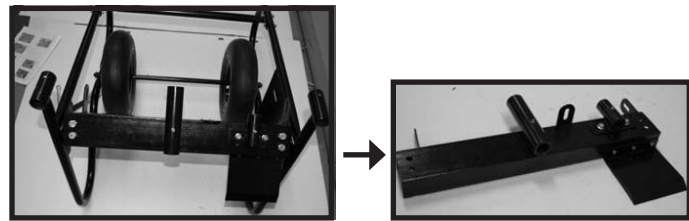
Ensure frames are perpendicular to axle and that wheels are INSIDE the frames.
